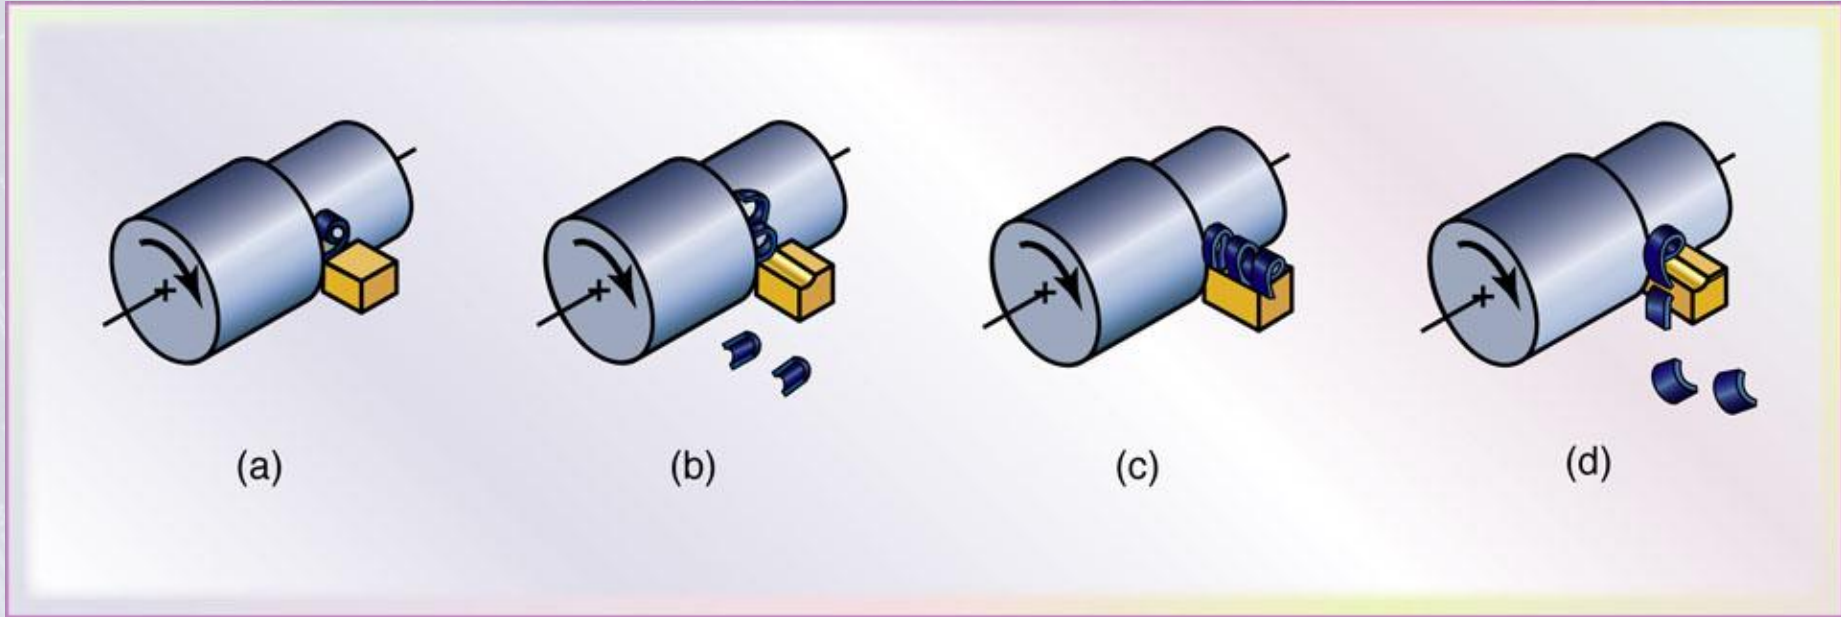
Chips produced in turning: (a) tightly curled chip; (b) chip hits workpiece and breaks; (c) continuous chip moving radially away from workpiece; and (d) chip hits tool shank and breaks off. *Source:* After G. Boothroyd.
